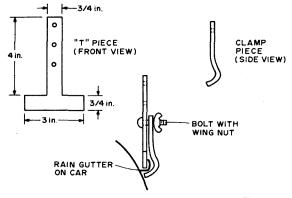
Rain gutter mount showing "T" piece, clamp piece and assembly of two pieces together on rain gutter. All holes are 1/4".
